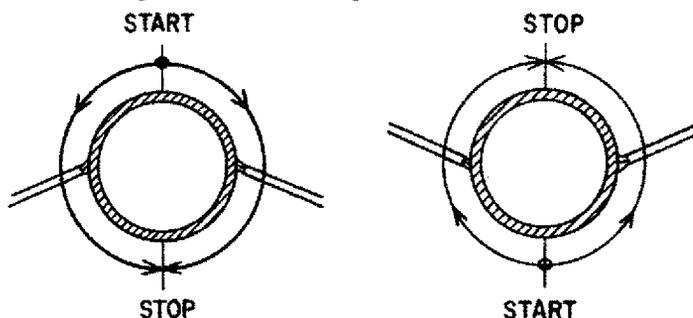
(Left) General procedure for downhill pipe welding. Fig. 1-5. (Right) General procedure for uphill pipe welding.
